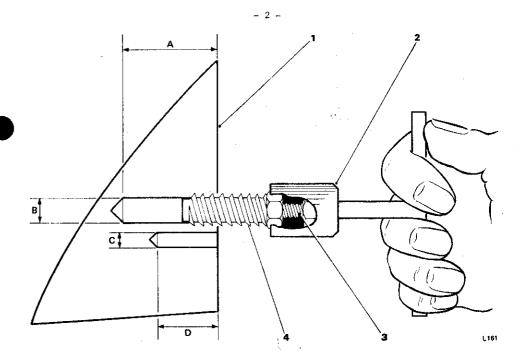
Showing drilling dimensions and method of fitting the brass insert
